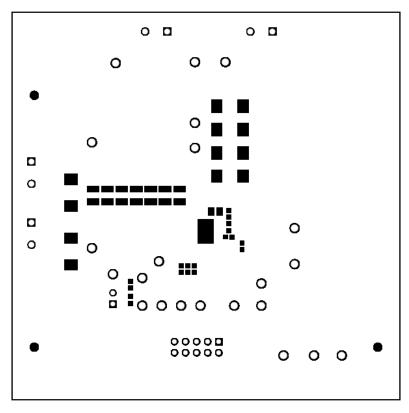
PWR-784EVM Bottom Solder Mask (Top View)
